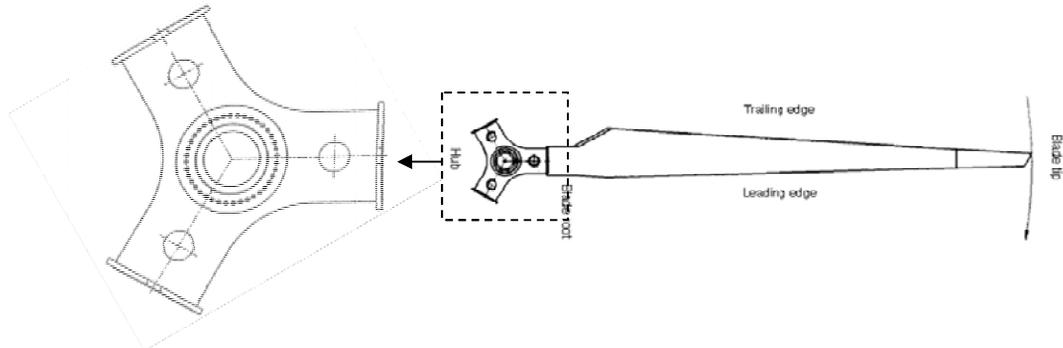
Basic components of a wind turbine rotor blade and aerofoil cross section.
